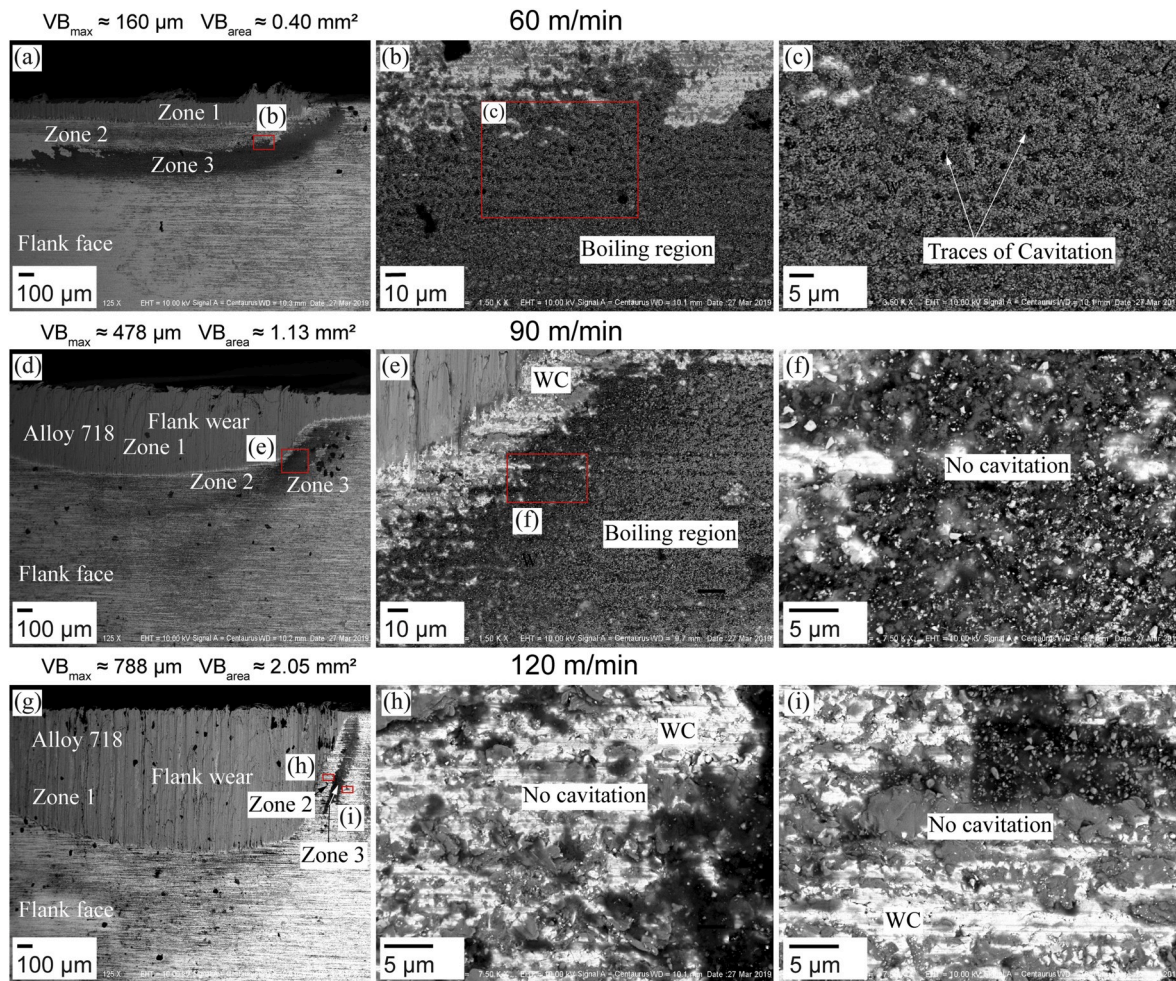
BSE micrographs of flank faces of the cutting tools machined at different cutting speeds for Tool-2 (a–c) 60 m/min, (d–f) 90 m/min, and (g–i) 120 m/min.
